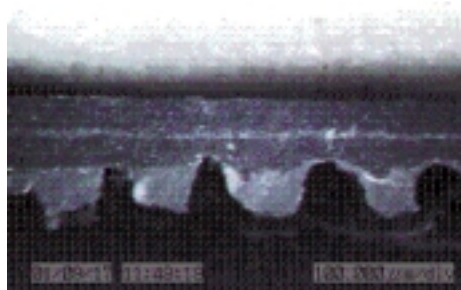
Cutting Surface of Welded Parts by Saw-toothed Sonotrode
